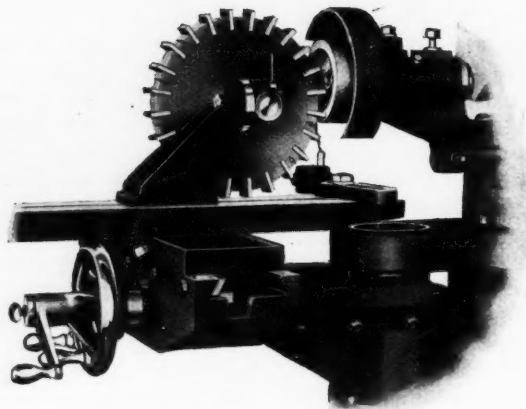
Sharpening Faces of Inserted-tooth Milling Cutter
